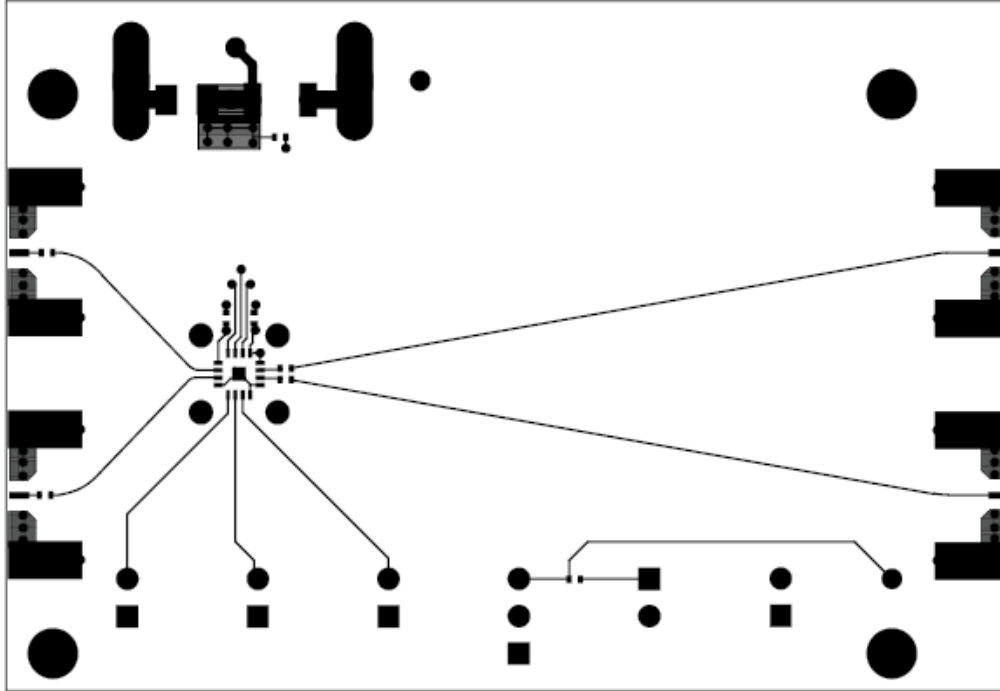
MAX3982 EV Kit PC Board Layout – Component Side, Layer 1
